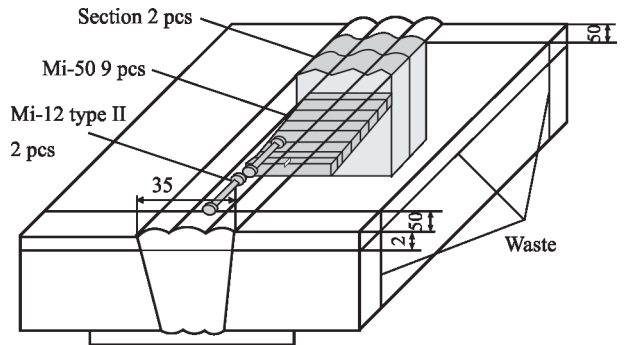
Scheme of taking samples for determination of the chemical composition, mechanical properties and structure of the weld metal
